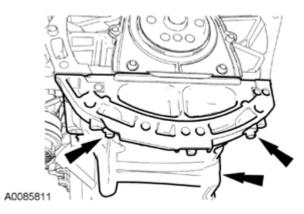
Locating Oil Pump Drive Chain Tensioner, Bolt And Tensioner Spring Courtesy of FORD MOTOR CO.
